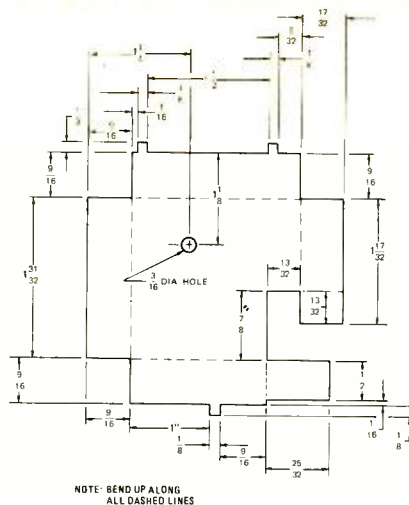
TOP RF SHIELD is cut from sheet metal and soldered to component side of main board.
